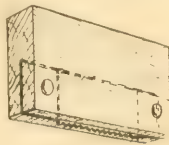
COMMUTATOR-SLOTING TOOL.
